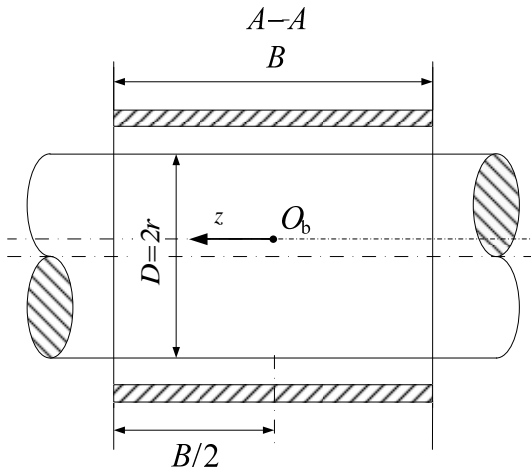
FIGURE II. THE CROSS SECTION OF OIL-LUBRICATED JOURNAL BEARING.
